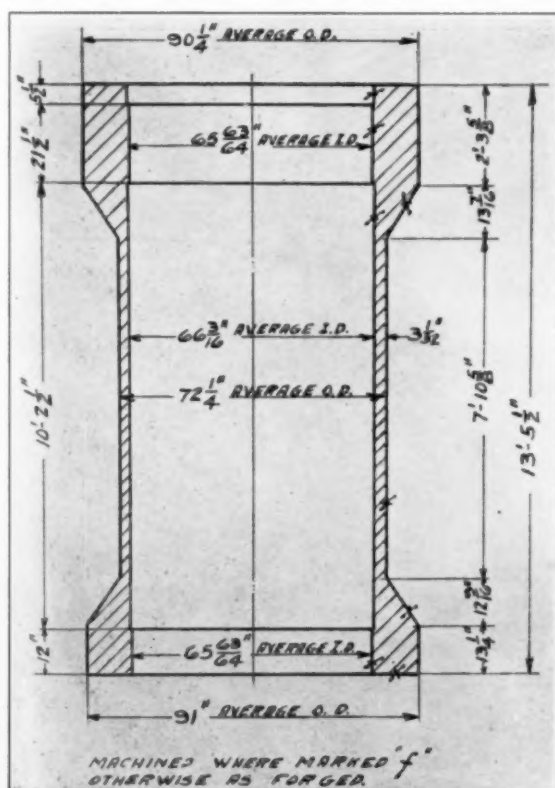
SKETCH SHOWING DIMENSIONS OF THE PIPE BEFORE THE TEST
